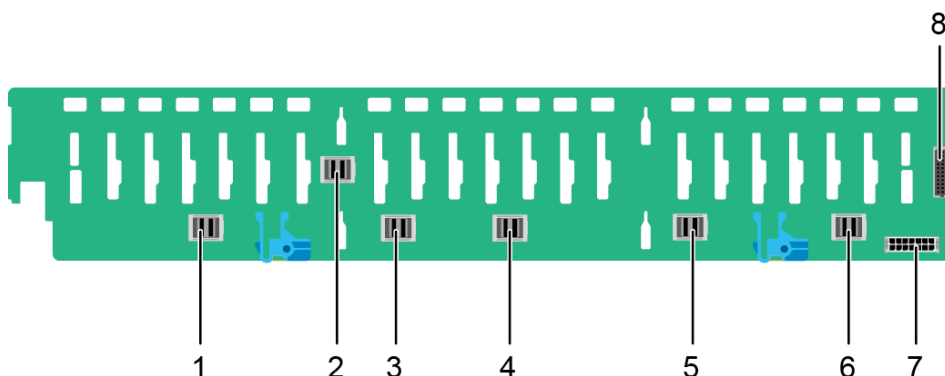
12 x 3.5" drive EXP backplane (BOM 03027FAT)
